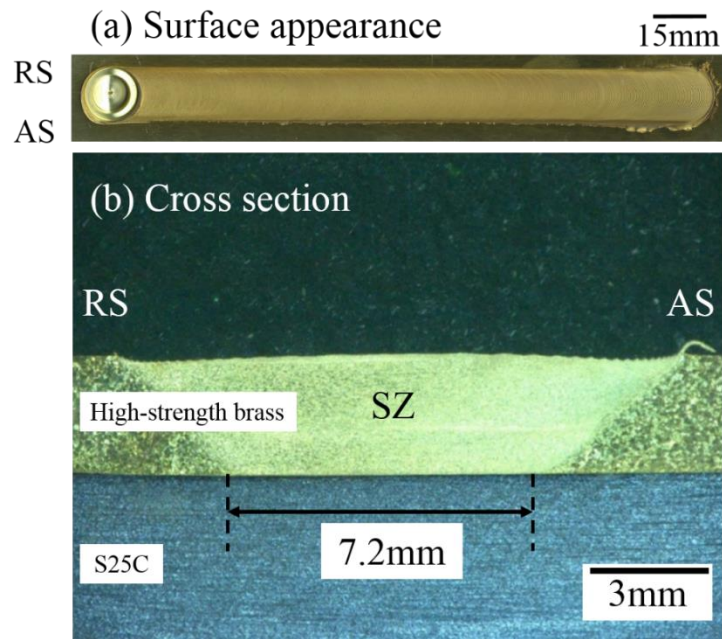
Surface appearances and cross-sections of joints welded with 1250 rpm, 500 mm/min, 9.8 kN and the tool with SD 15 mm, PD 10 mm and probe length 2.9 mm.
